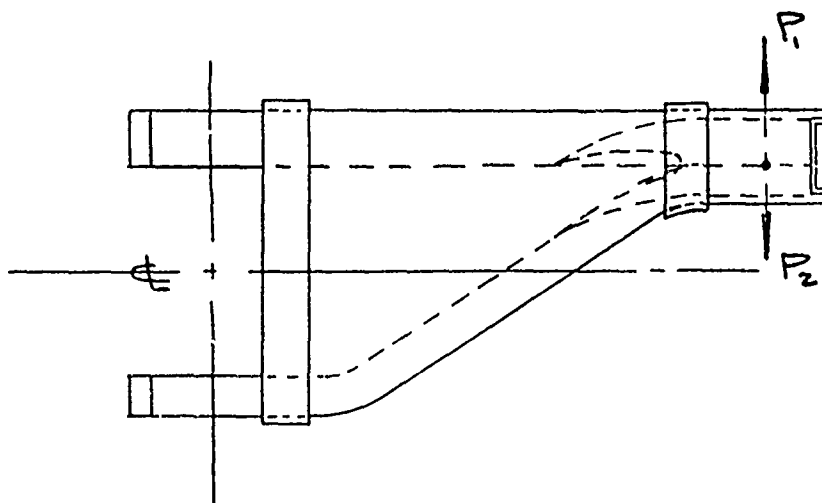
Boron-Epoxy Torque Arm Specimen Test Setup
